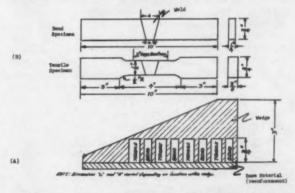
Sketch showing location and dimensions of tension and bend specimens taken from groove welded test block.
